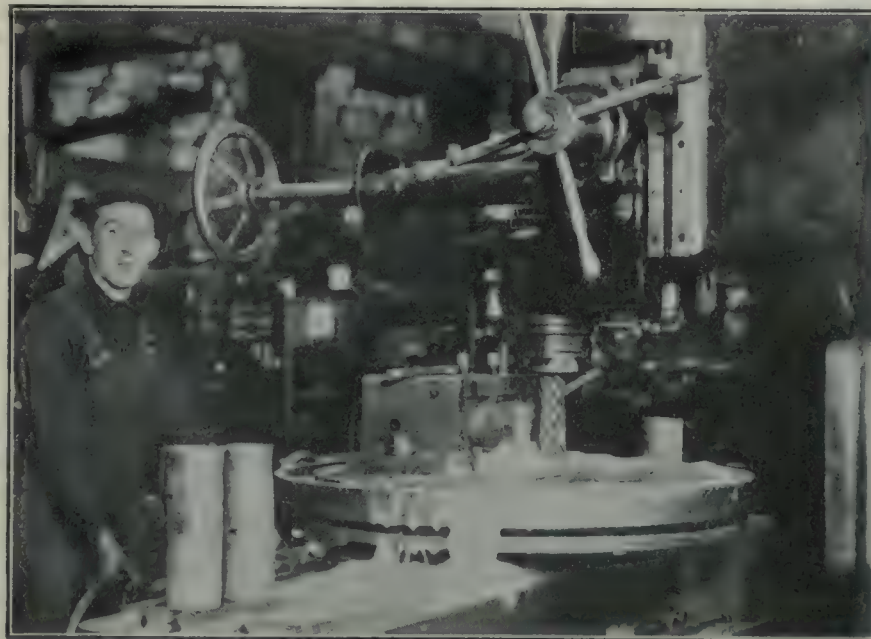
MILLING BACK END OF 18-PDR. SHRAPNEL SHELLS ON A HERBERT VERTICAL MILLING MACHINE.
